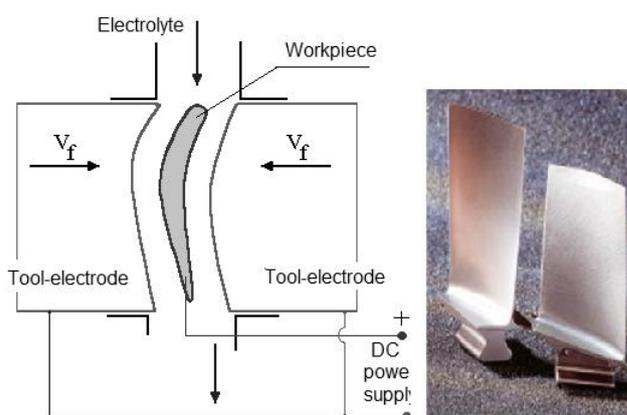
Principal scheme of electrochemical machining (ECM) and example of the machined airfoils.
